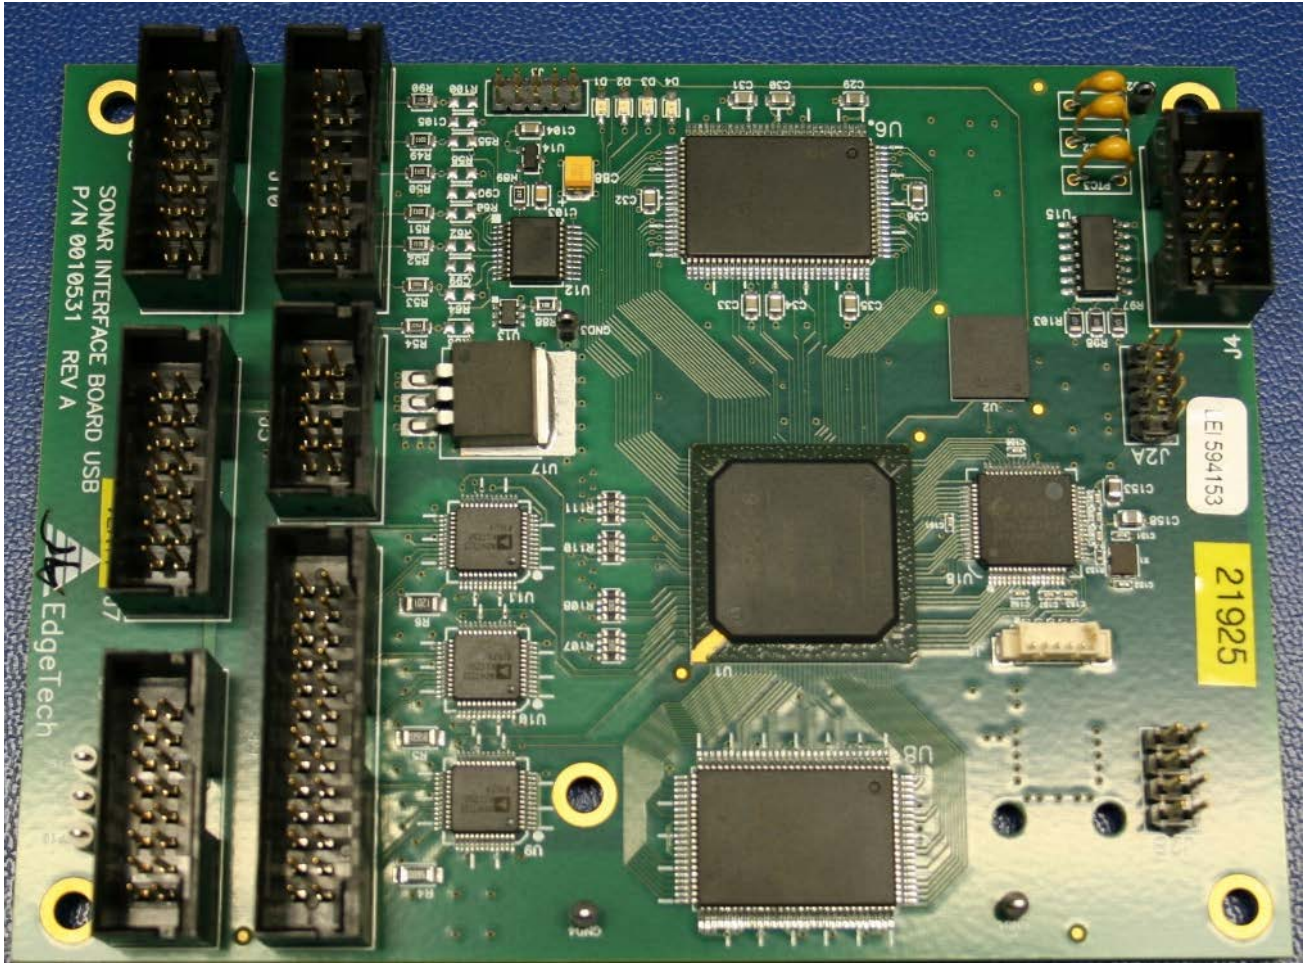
Tiger Board Set: SIBU aka Sonar Interface Board – 0011637
